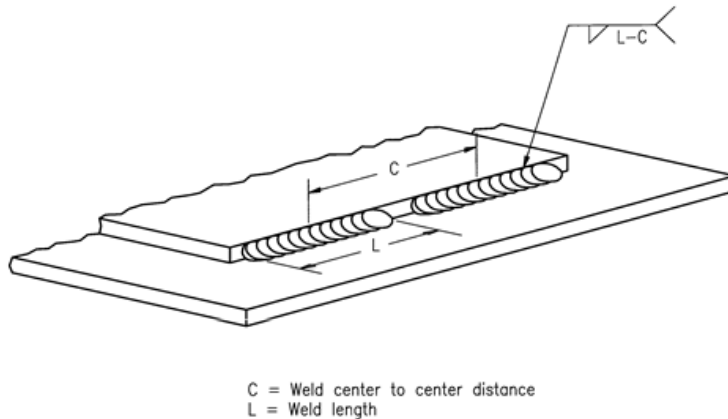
G-10: Intermittent fillet weld spacing.^{A-12}
